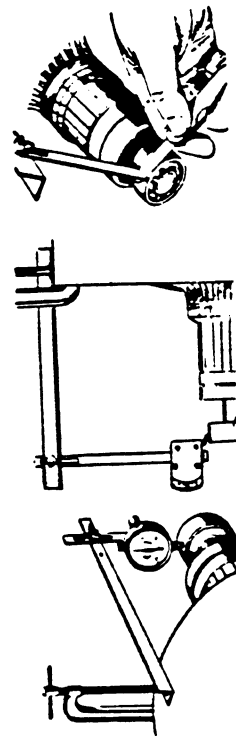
CHECKING GENERATOR BEARING RUNOUT
